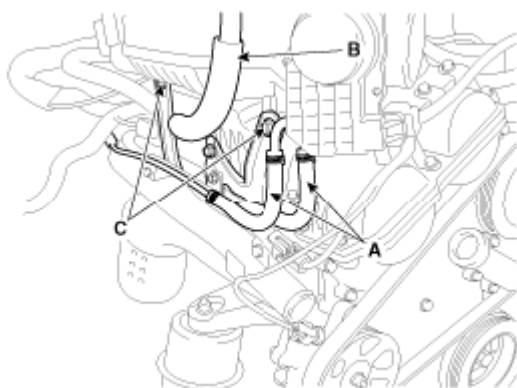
Identifying Throttle Body Coolant Hoses, Breather Hose, & Surge Tank Stay Bolts
